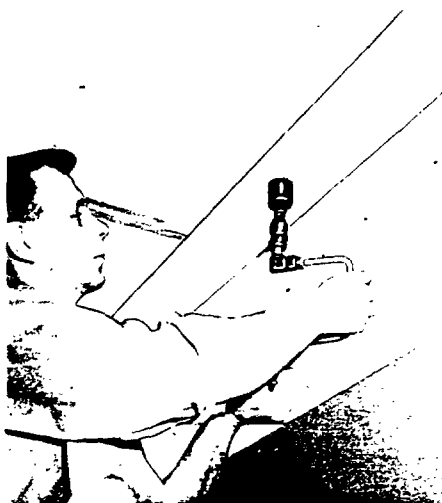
Drilling Wiring Recess for THERMALUX Bushing
